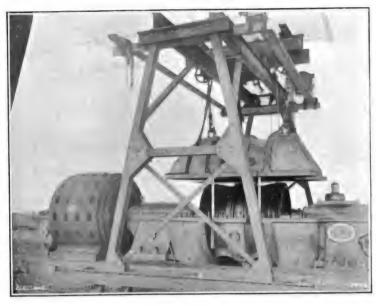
WESTINGHOUSE TURBO-GENERATOR SET. THE HASTINGS MILL.
